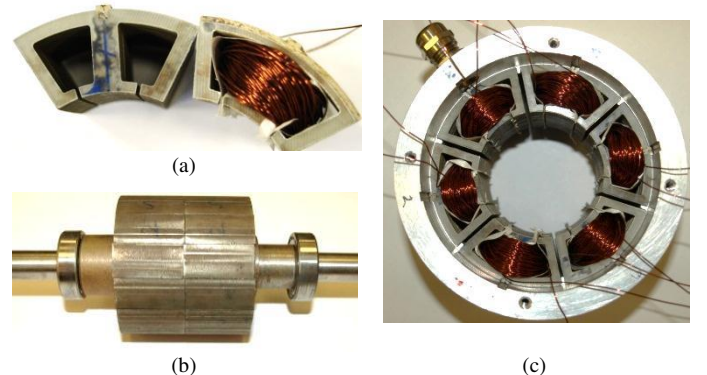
Prototype machine with tooth tips. (a) unwound and wound stator segments, (b) 14-pole rotor, (c) completed stator and frame.
